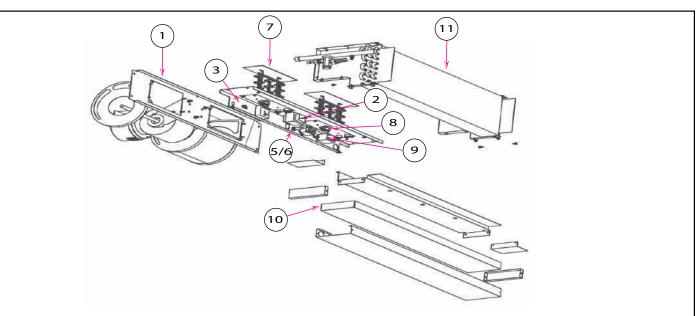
SEHX/ CEHX/ SCWE/ CCWE 34-35 Electric Heat Air Handler Replacement Parts Schematic
